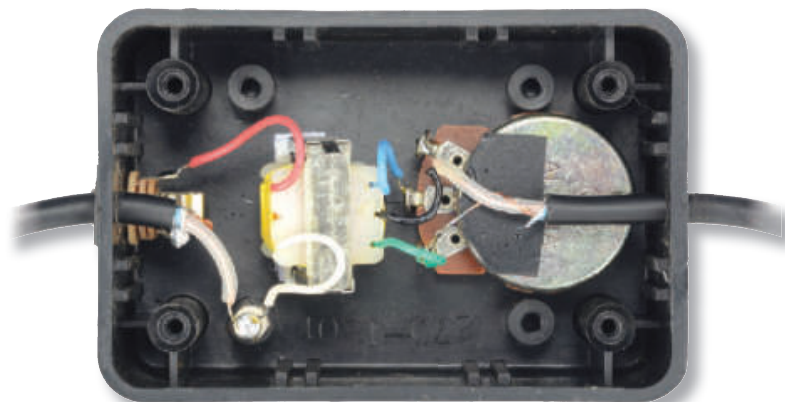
Inside view of keyer in project box showing assembly technique. The black wire is not connected.
